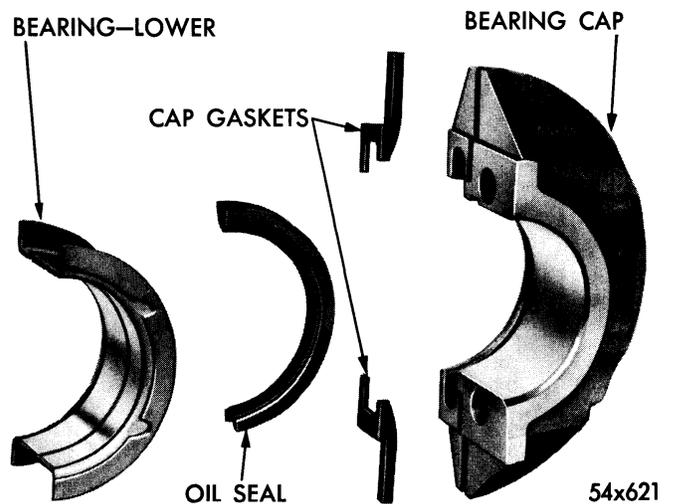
Rear Main Bearing and Cap Seals—6 Cylinder Engine
